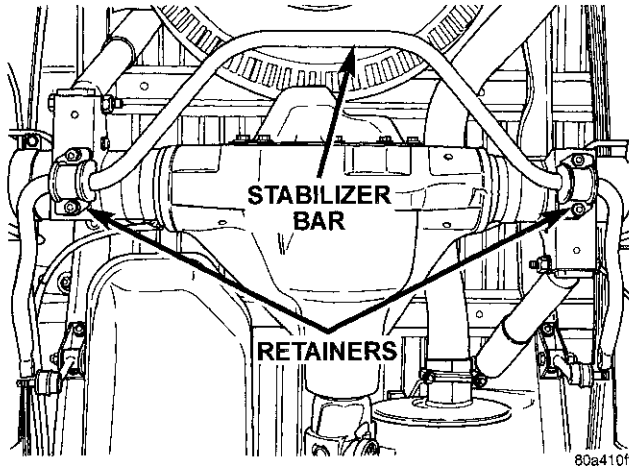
Stabilizer Bar Mounting Bolts And Retainers
